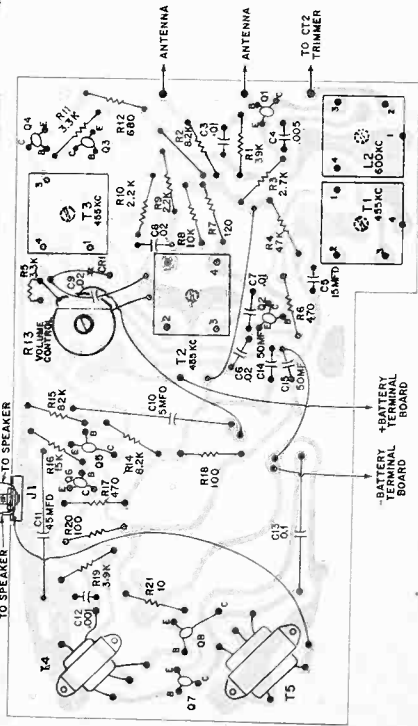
PRINTED CIRCUIT CHASSIS DIAGRAM
